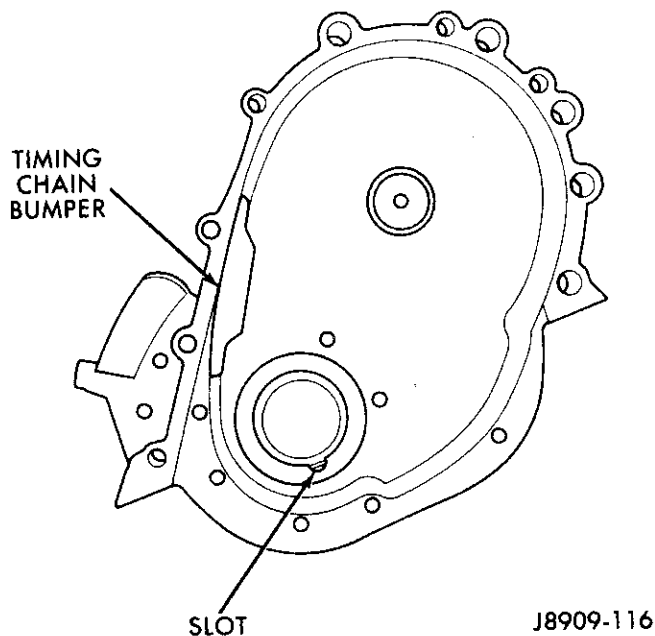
Removing Timing Case Cover Oil Seal and Timing Chain Bumper
